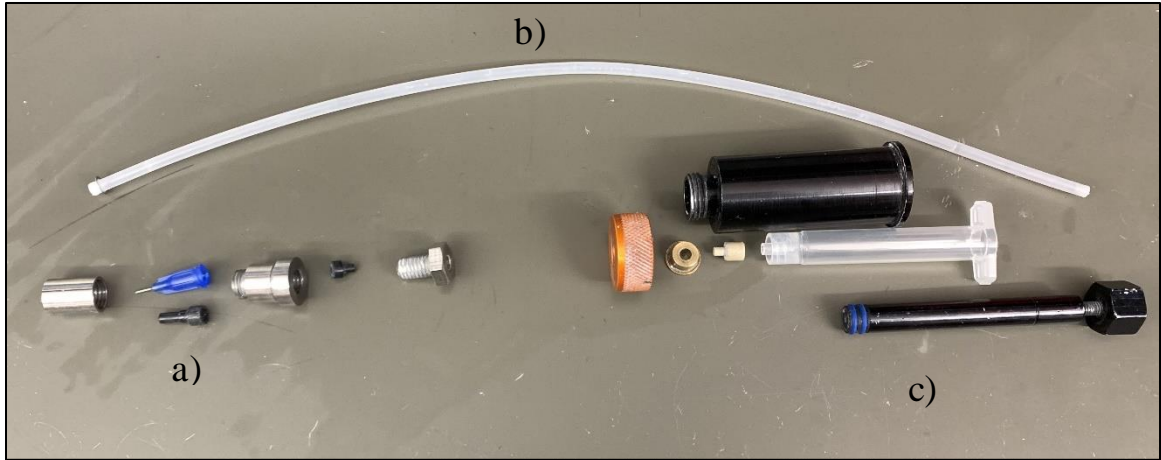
Constituent parts of the ink syringe assembly: a) the nozzle assembly, b) the tube and c) the ink syringe assembly.
